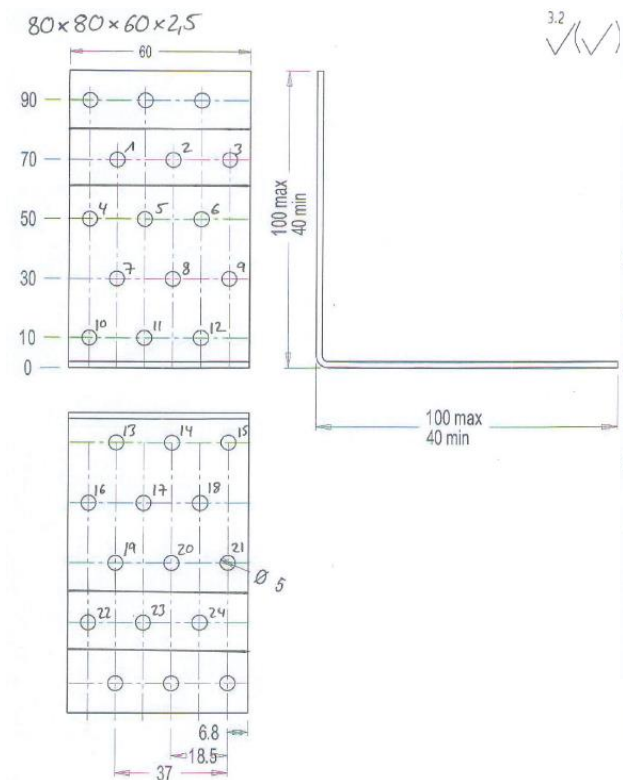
Dimensions of angle bracket 80x80x60x2,5
